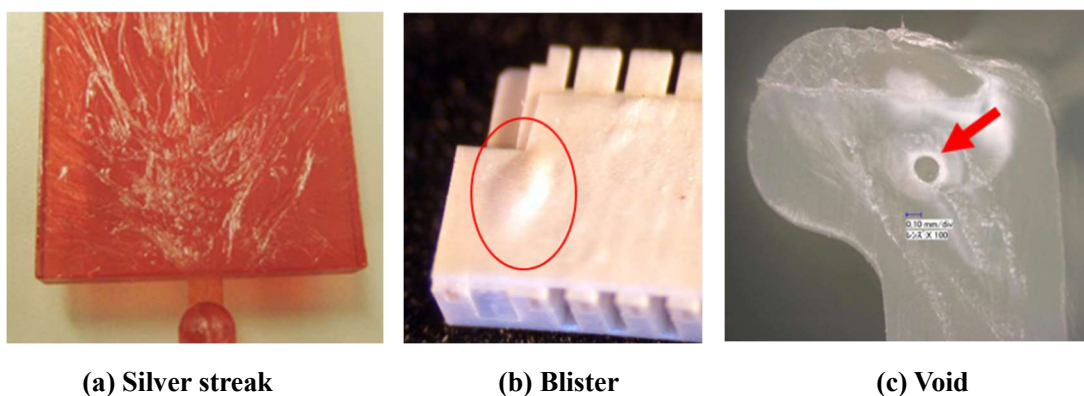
Various types of molding defects in injection molding.
